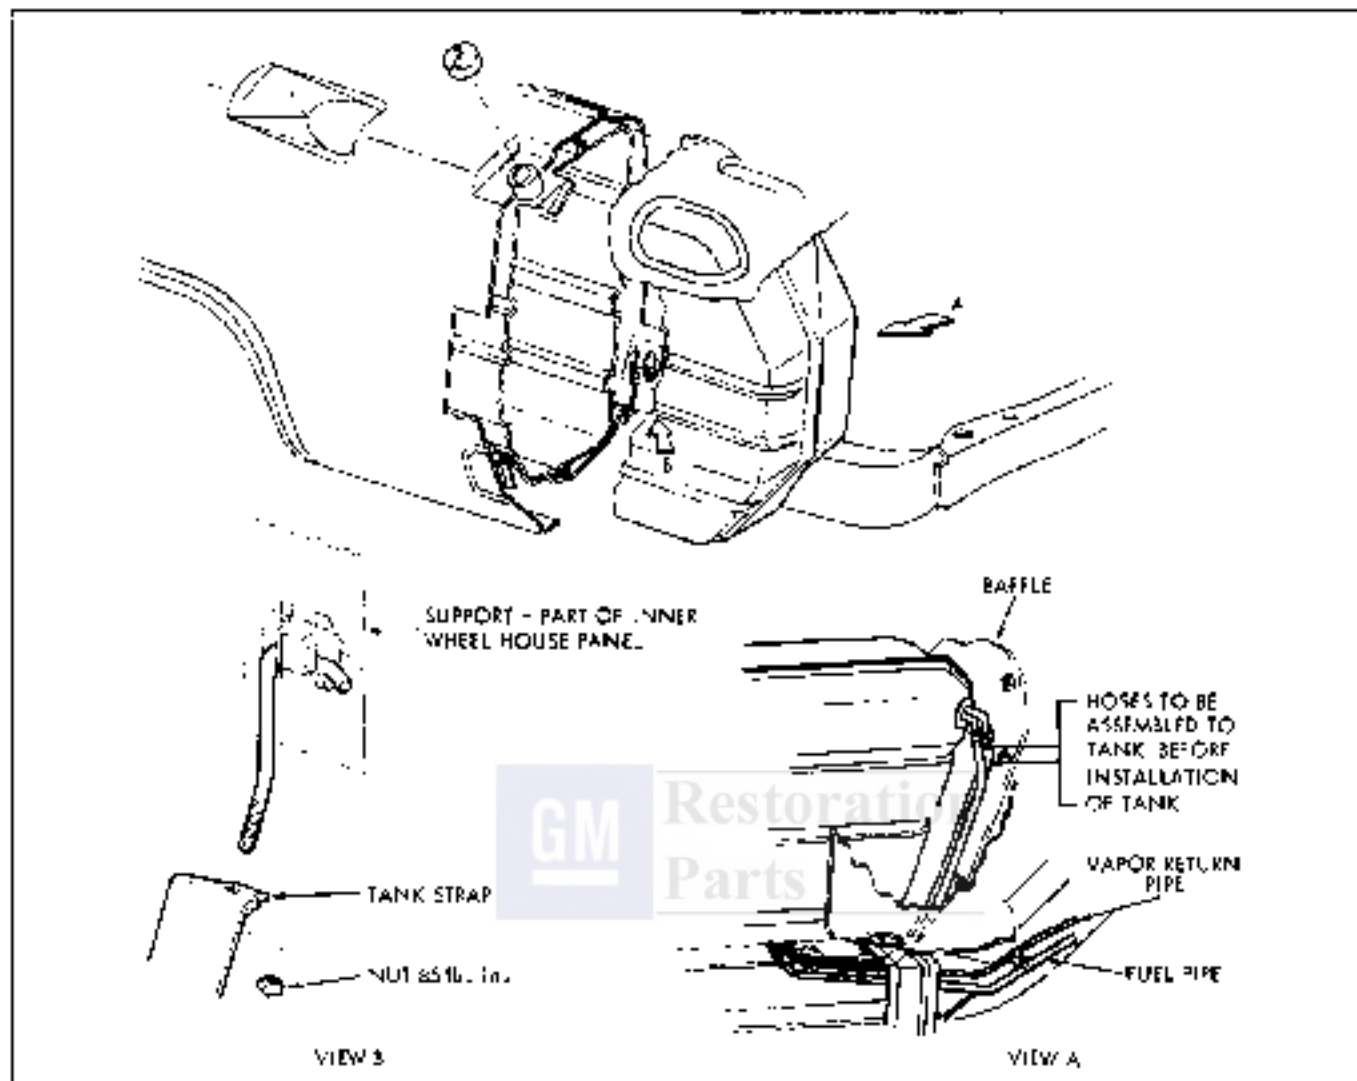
Installation of Fuel Tank Pontiac Striplin Wagon
